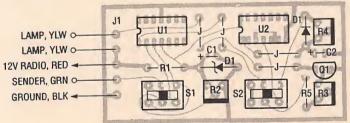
Here's the printed-circuit board's parts-placement diagram. Careful attention should be paid to component orientation, which will prevent most construction errors.
